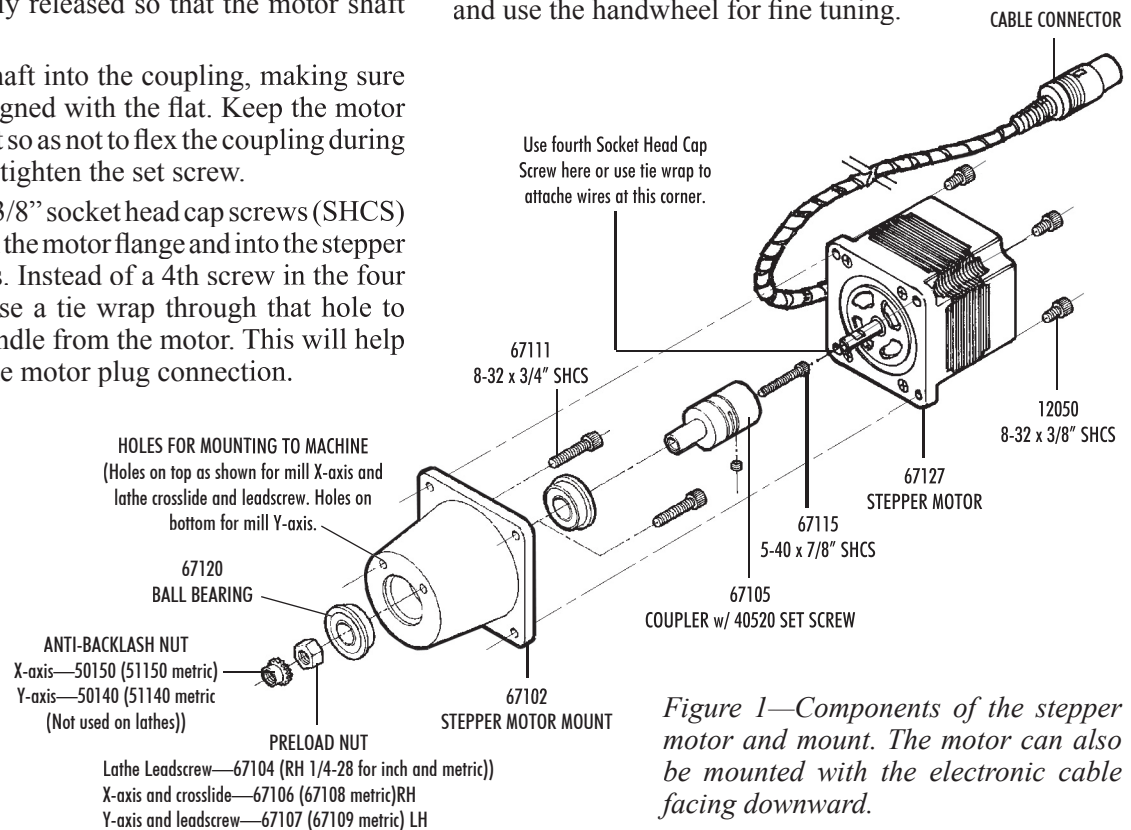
Components of the stepper motor and mount. The motor can also be mounted with the electronic cable facing downward.
